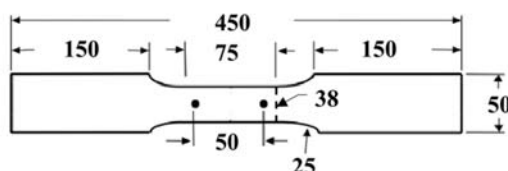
Geometry and dimensions (in mm) of tensile specimens
